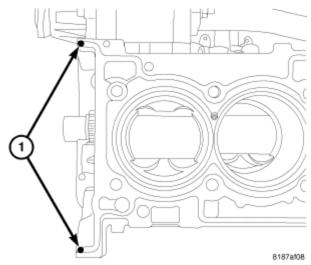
Cylinder Head Gasket RTV Courtesy of CHRYSLER LLC
